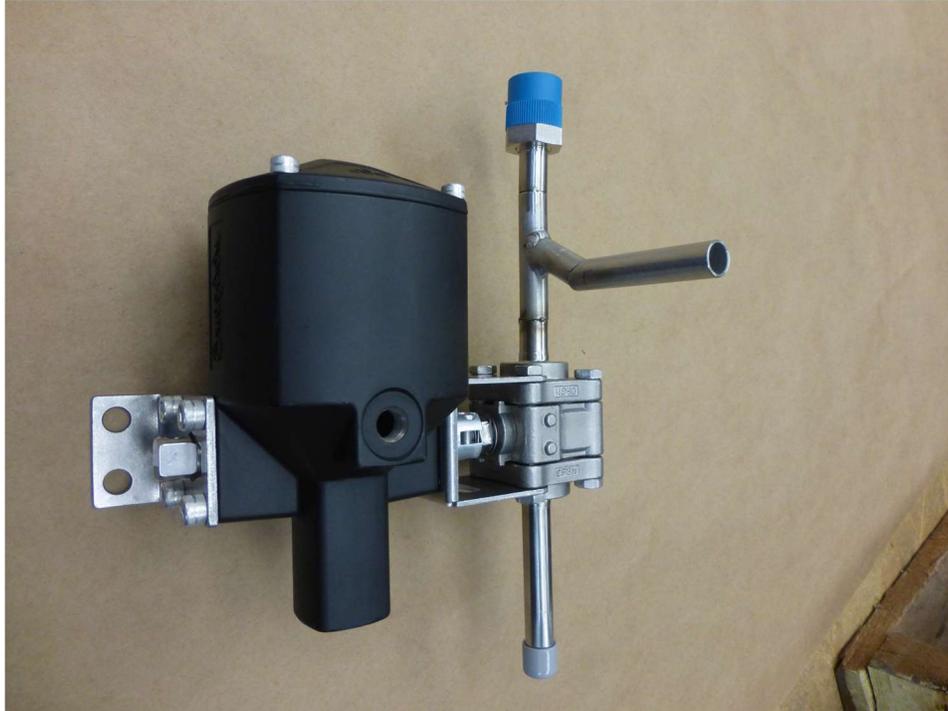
Electro-pneumatic sodium valve during tube weld procedure.
